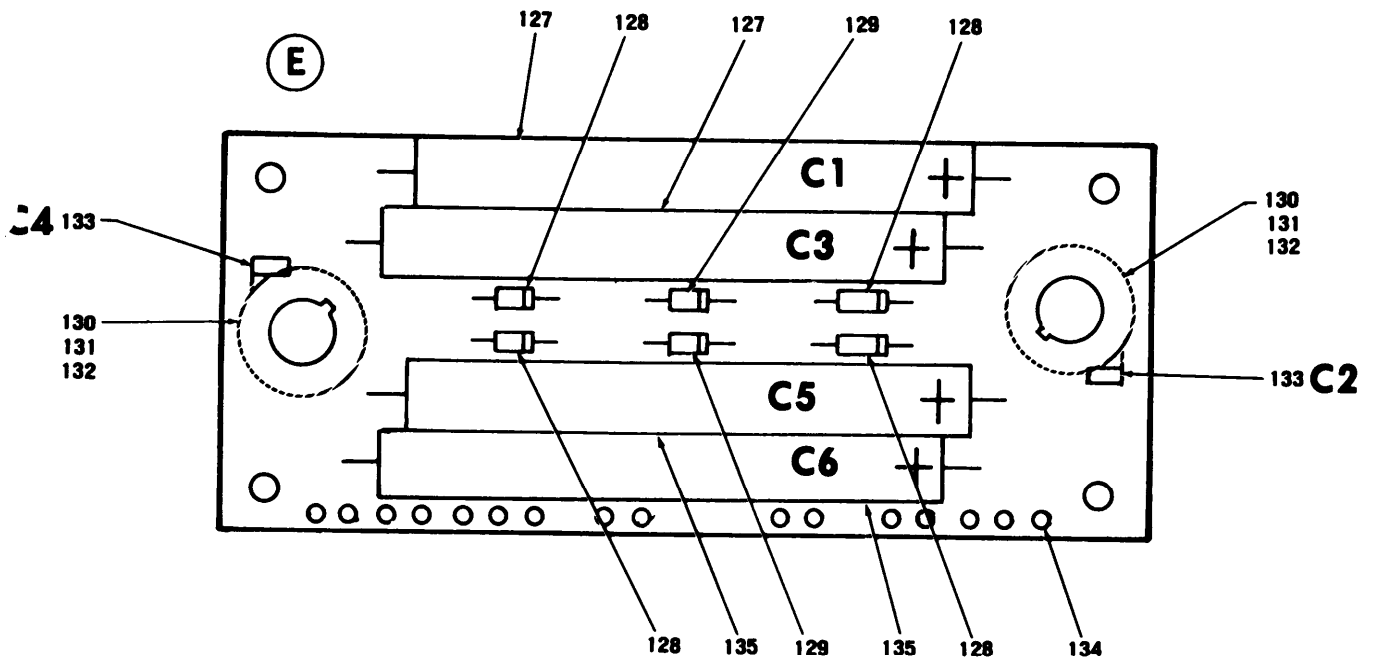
Circuit Card Assembly, Power Supply A6 (Sheet 4 of 4)
